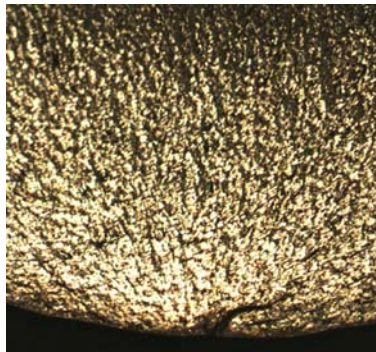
Typical fatigue fracture surface of the investigated specimens.
